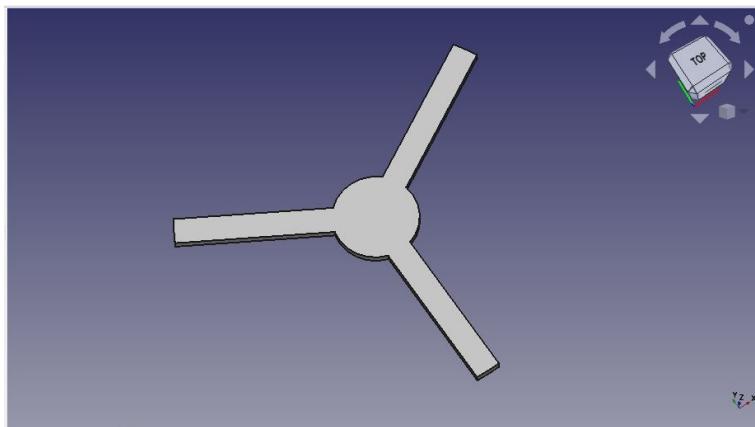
CAD model for the first blade. This was used to cut the shape out of the plywood
